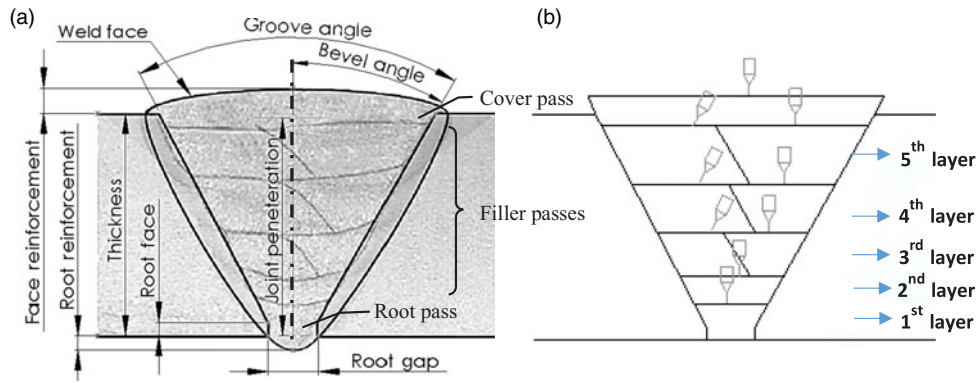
(a) Multi-layer V-groove weld, (b) simplified state of a weld joint with welding torch orientation.
